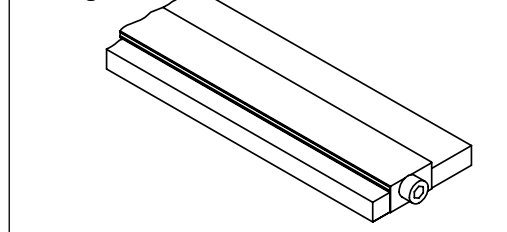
Magnetic tape screwed to the top of the mounting bed
